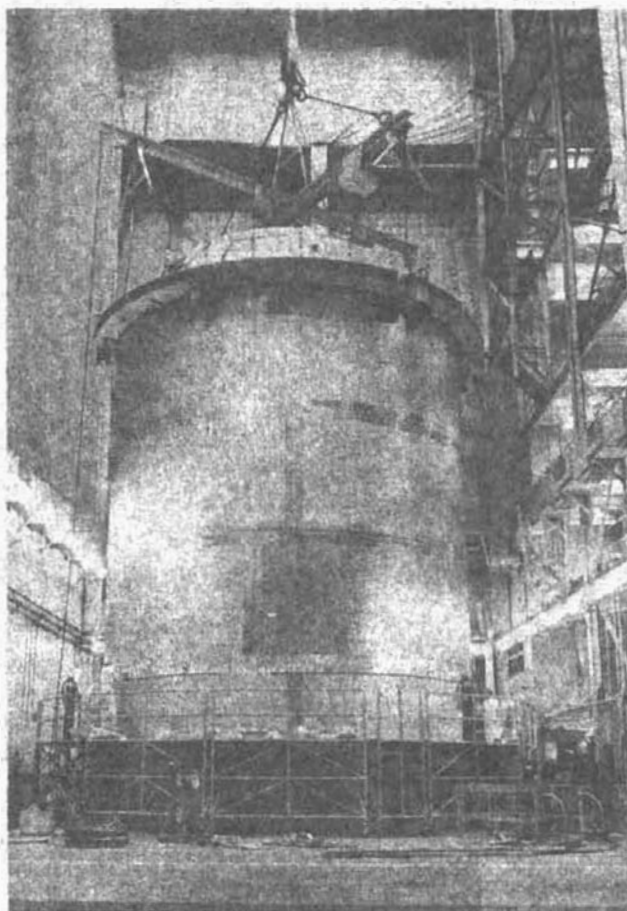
THE JOINING OF UPPER AND LOWER HALF OF S-IC-D LOX TANK IN PIT #2 VAB
